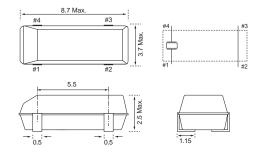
ECX-3061 - Top, Side and End views with pin connections
